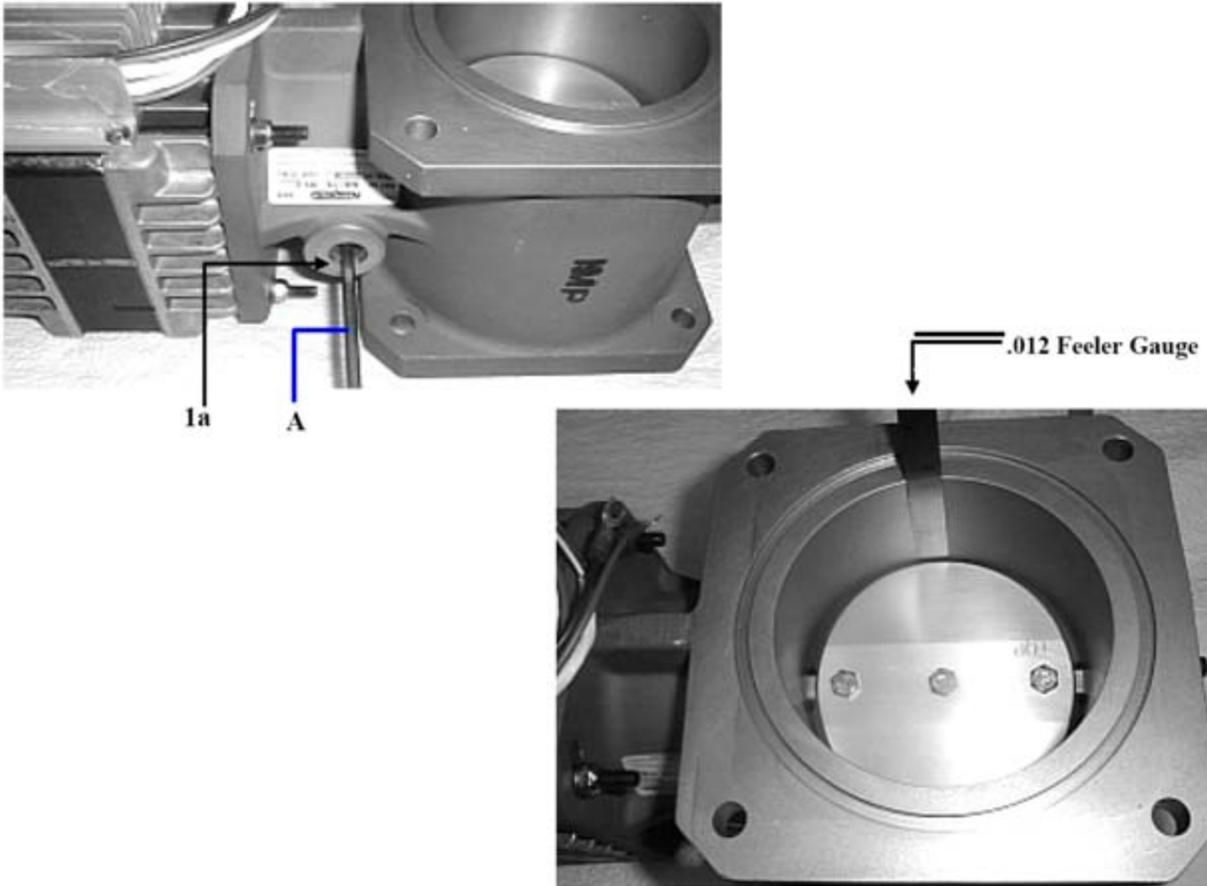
Tighten the Coupler and Install Access Port Plug
